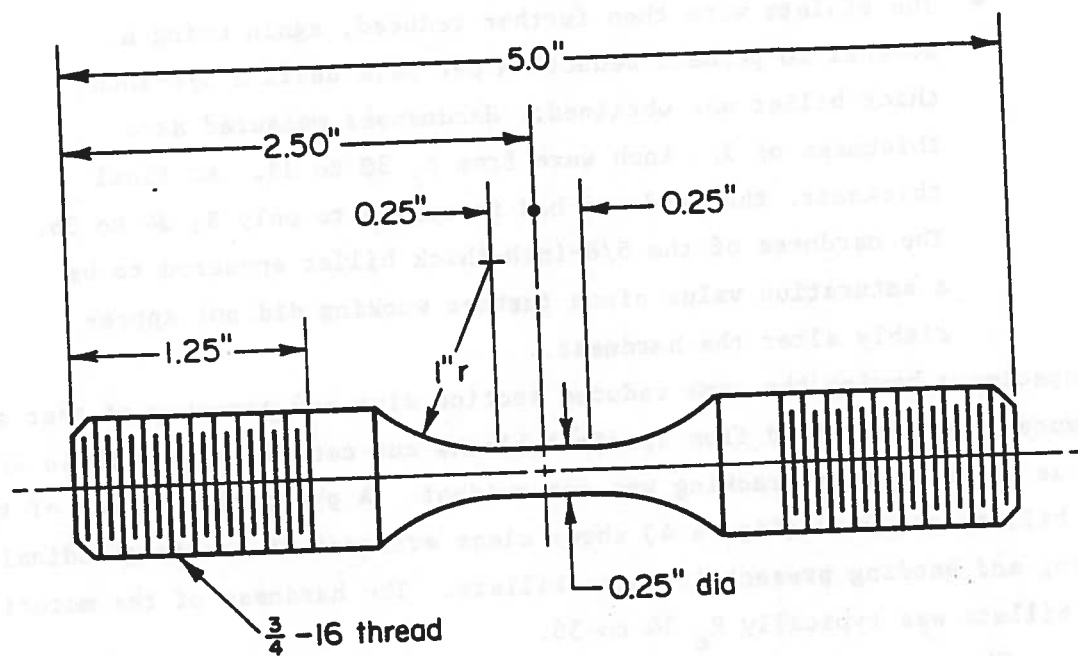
LONGITUDINAL UNIAXIAL FATIGUE TEST SPECIMEN
